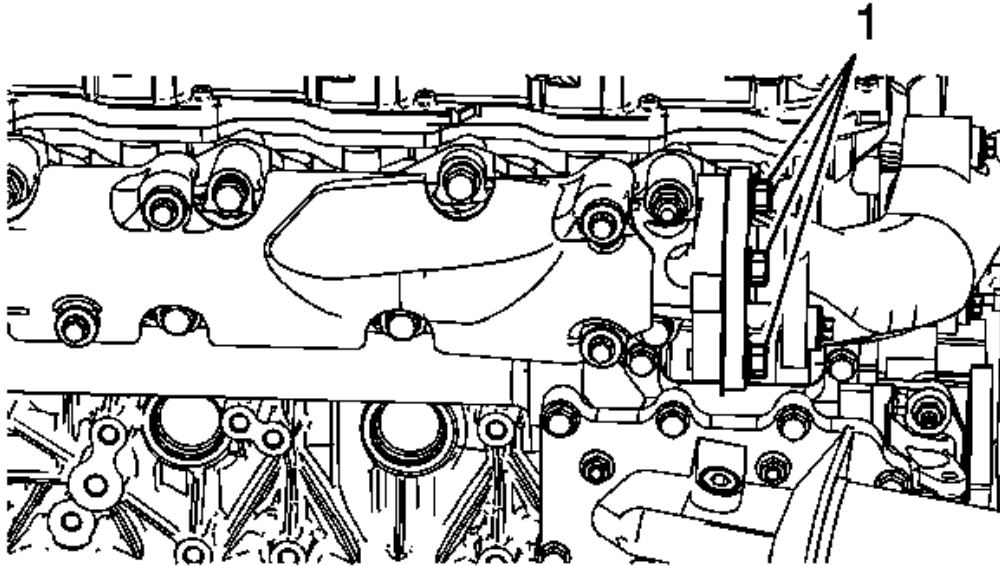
View Of Exhaust Pipe To Exhaust Manifold Bolts
